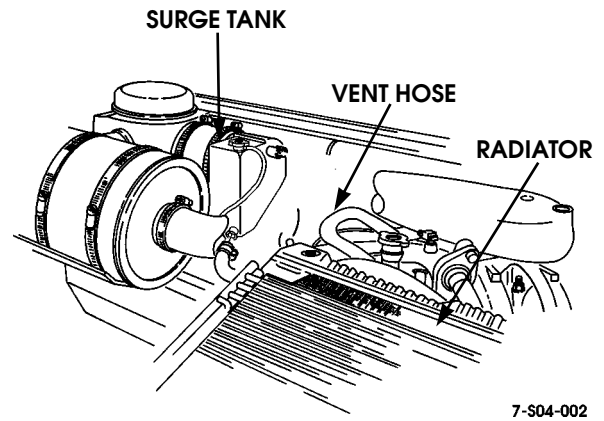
Surge Tank-to-Radiator Vent Hose Location
